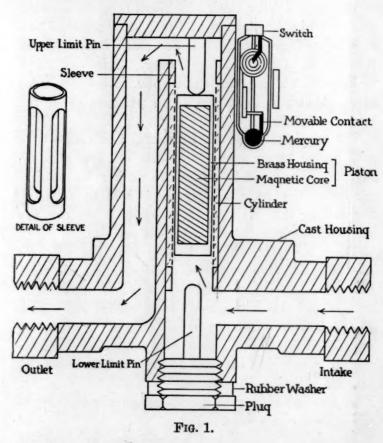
shows the changes in the piston-cylinder assembly. The electrical and magnetic features are unchanged.
